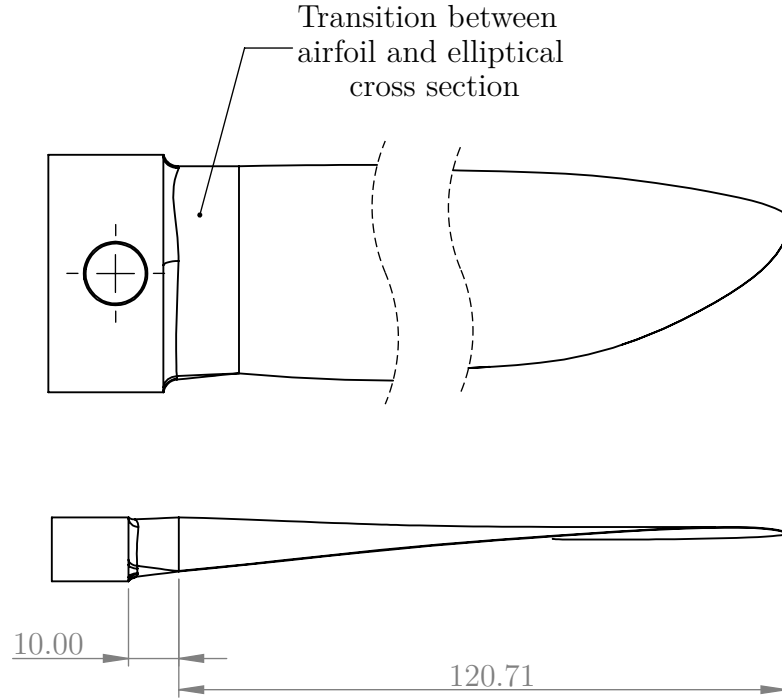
CAD drawing of the 3D-printed rotor blade, highlighting the geometry at the blade root. All dimensions are in mm.
